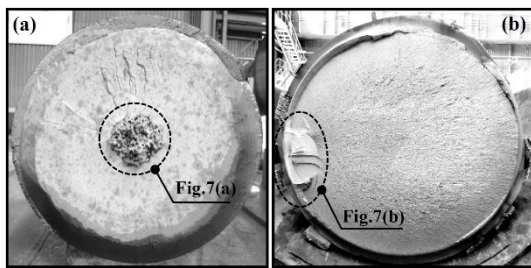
The fractography atlas of a manufacturing defect, (a) Example 1 and (b) Example 2.
